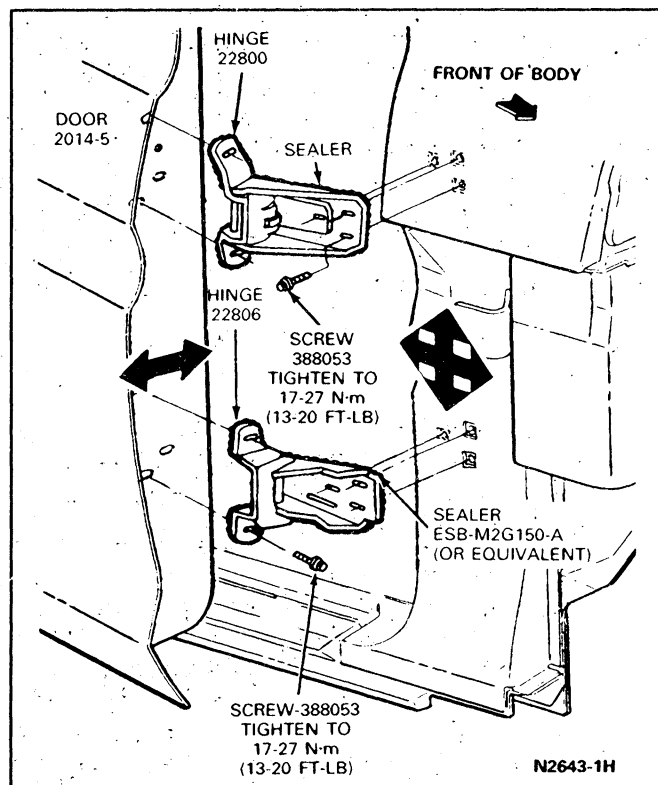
Door Hinge Adjustment—Bronco and F-150—F-350
